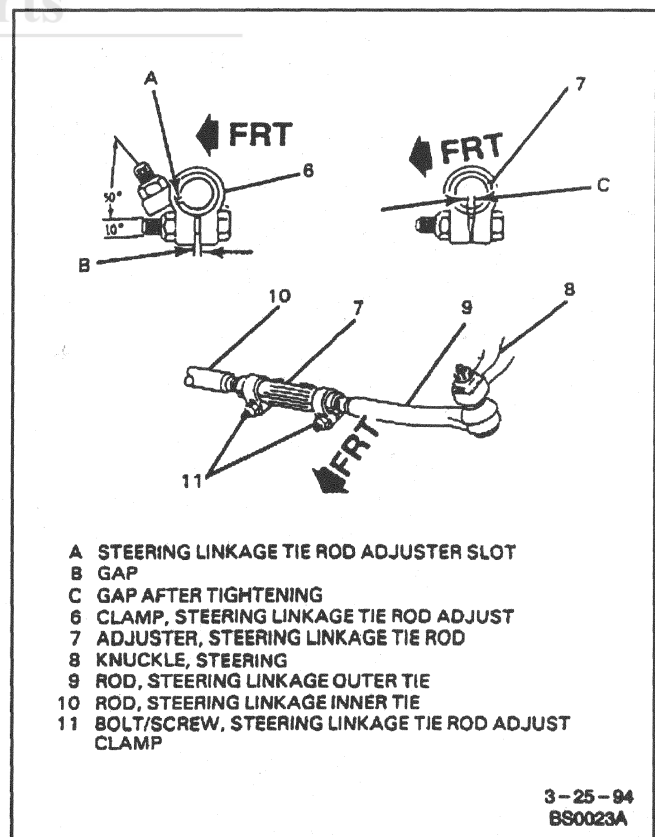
Positioning Tie Rod Adjuster and Tie Rod Adjust Clamps
